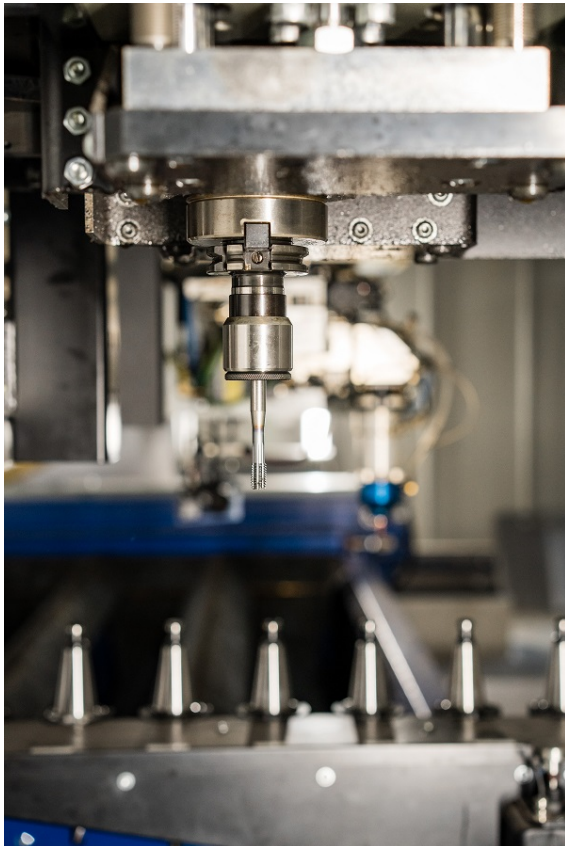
or 7b: Both machines are equipped with a drilling unit including 24 tool changer
